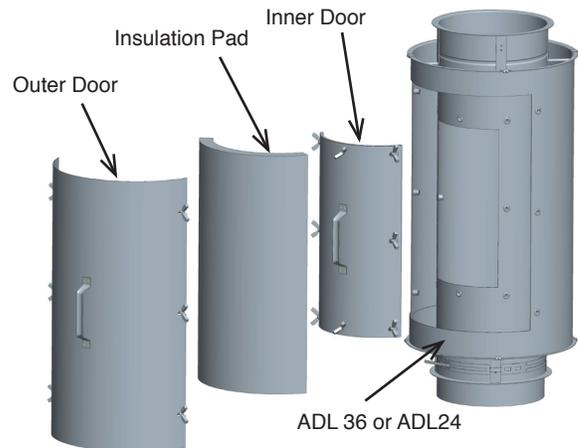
Step 4-5 of Removal for Inspection for the ADL
